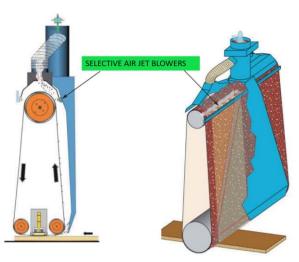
Drawing of selective air jet blowers in Costa Levitgatrici machines.
